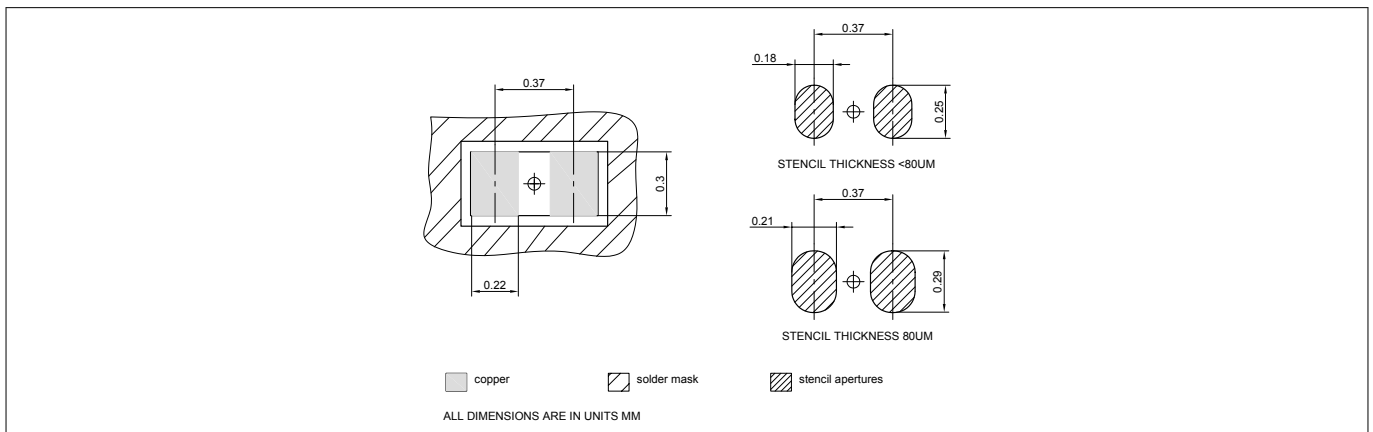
WLL-2-3 footprint - Recommendations for Printed Circuit Board Assembly see [2]
